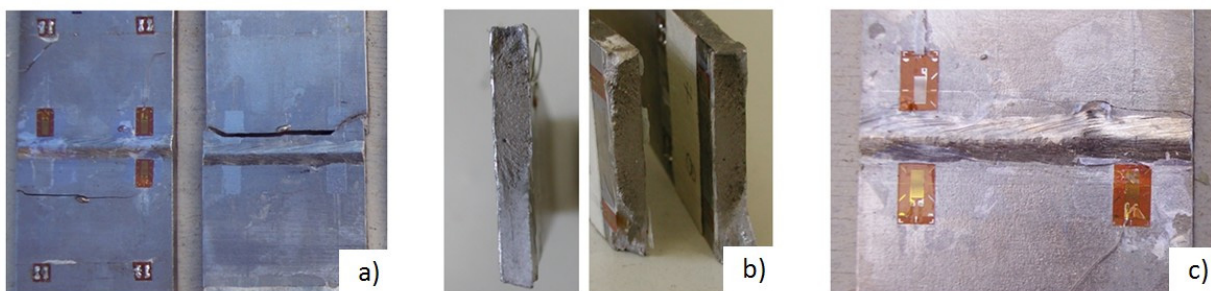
a) Fracture due to a spot of welding; b) Spherical cavities in the fracture section; c) Irregularities of the cord.
